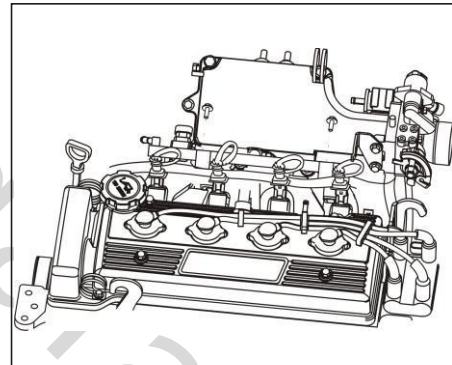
Removal of LF479/481 Engine Fuel Fixing Bolt
